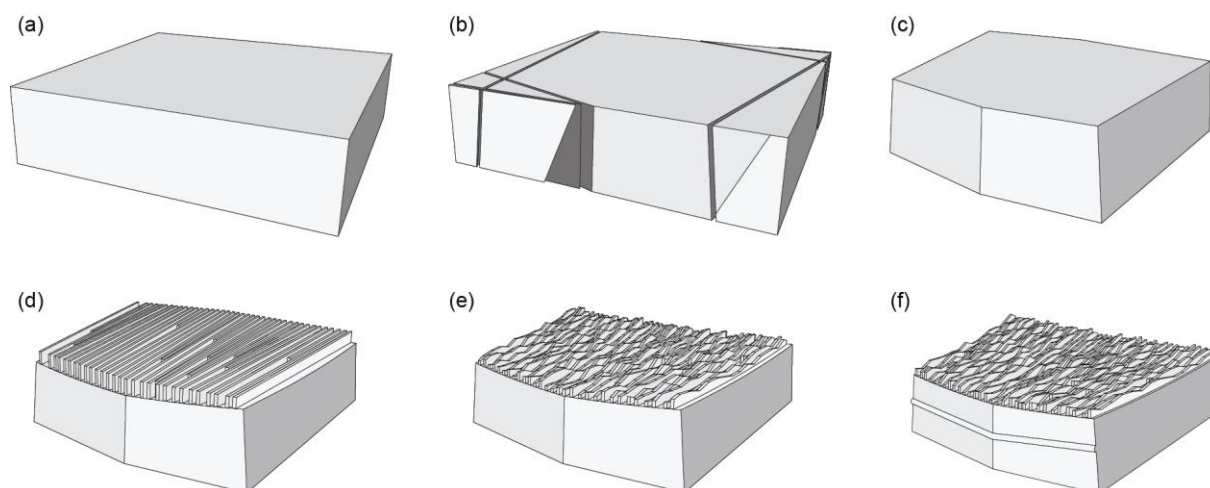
Machining sequence illustrating the cutting for a typical vault voussoir: (a) blank; (b) side-face pre-cuts; (c) best-fitting, planar approximation of the final side faces; (d) side-by-side cutting pattern on the intrados; (e) knocked-off cutting pattern on the intrados, and (f) side faces processed with custom-made profiling tools
